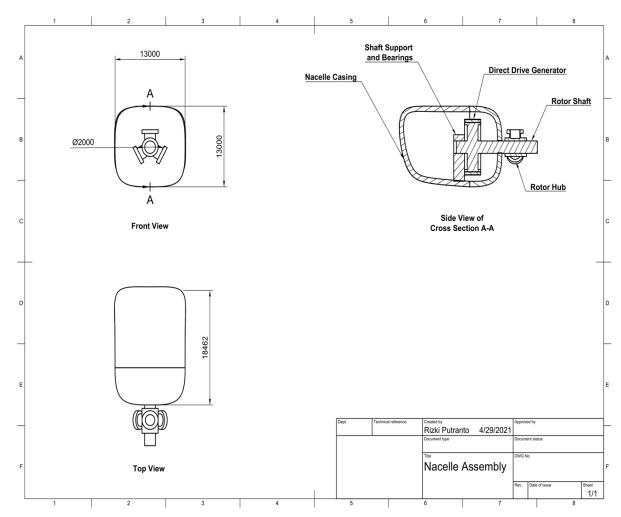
ENLARGED 2D CAD TECHNICAL DRAWING
